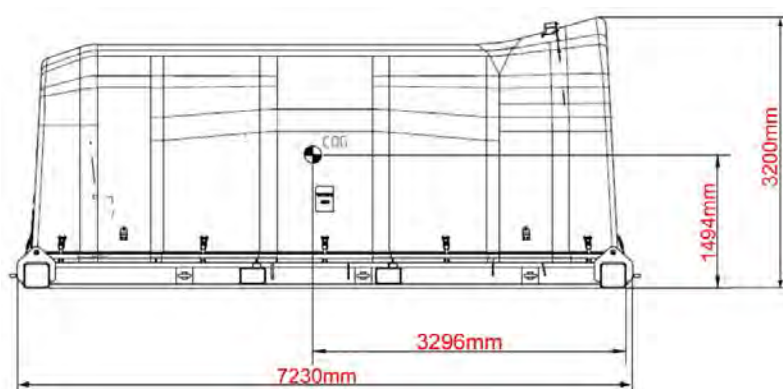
Dimensions of the drive train on a TUFD (side view)
